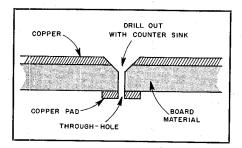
Cross section showing use of drill or countersink to remove copper from top side of circuit board.
